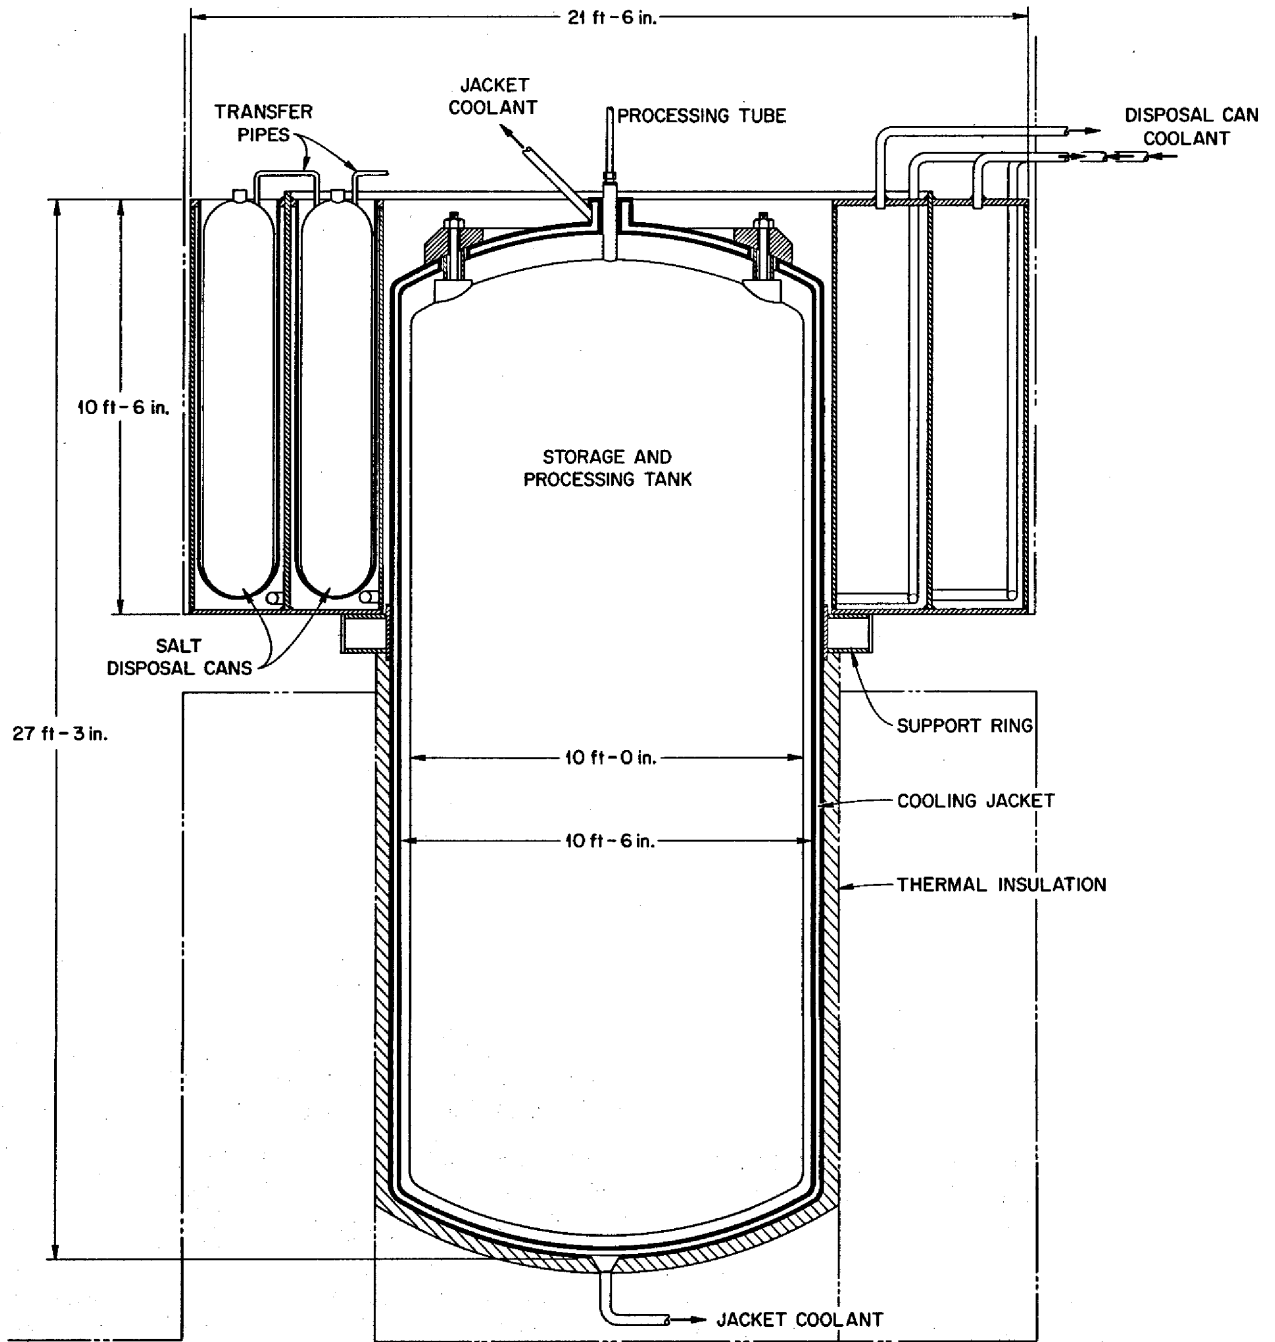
Sectional Elevation of Fuel Salt Storage Tank.
